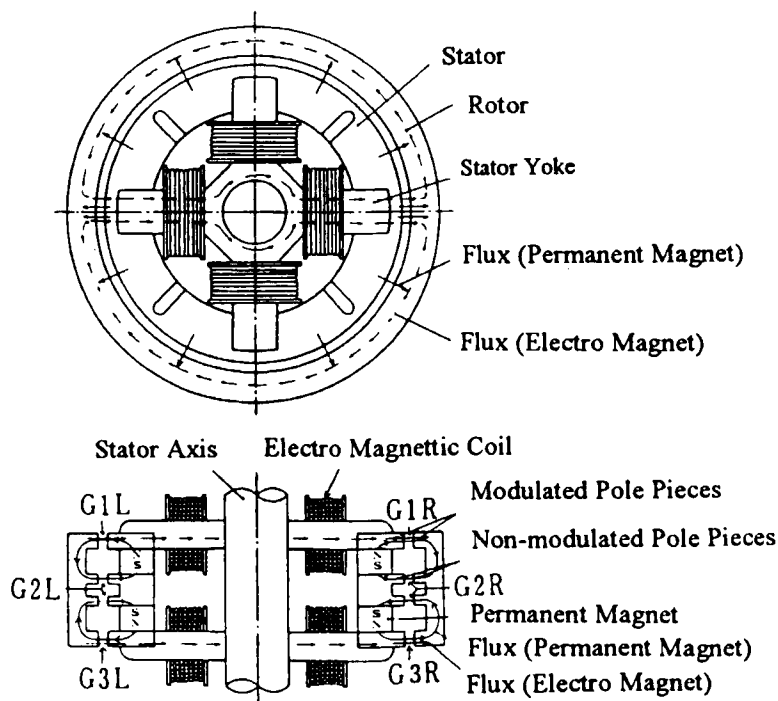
Cross Sectional View of 2-axis Actively Controlled Magnetic Bearings
